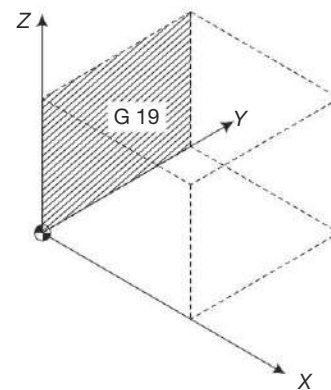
YZ plane selection for horizontal-axis milling machines
